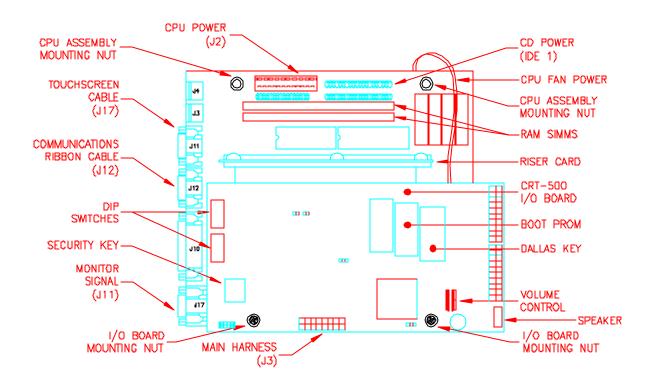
TELCO MOTHERBOARD AND I/O BOARD ASSEMBLY
